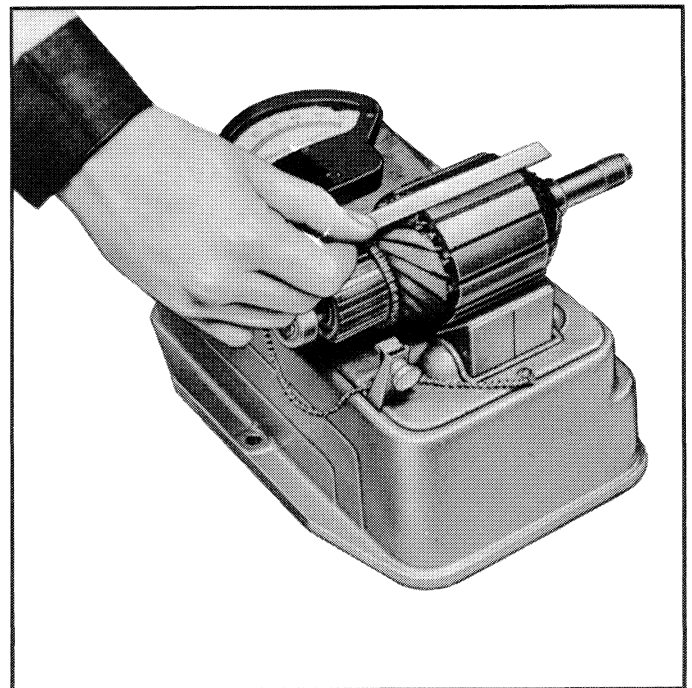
Checking Armature for Short Circuits Using a "Growler" Tester
